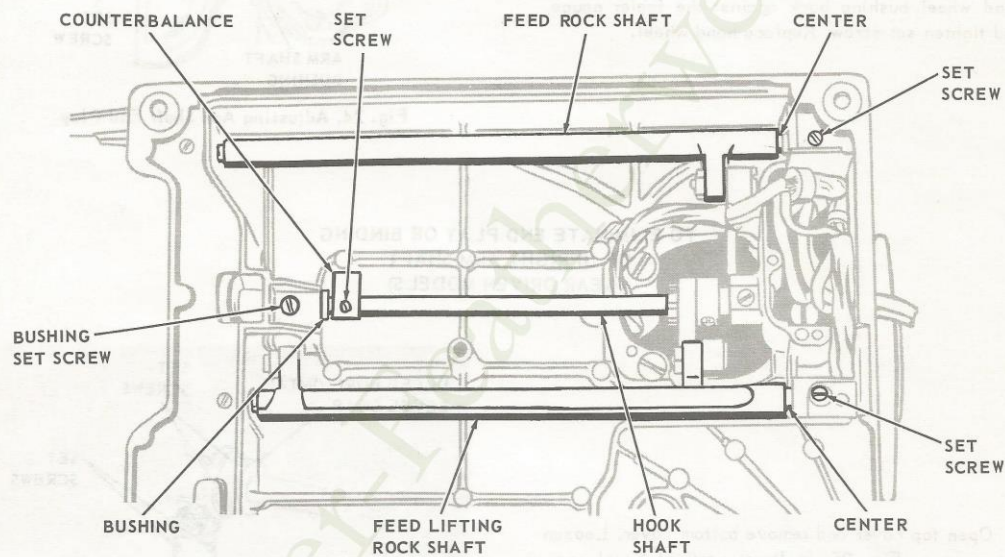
Eliminating End Play or Binding Beneath Machine Bed
